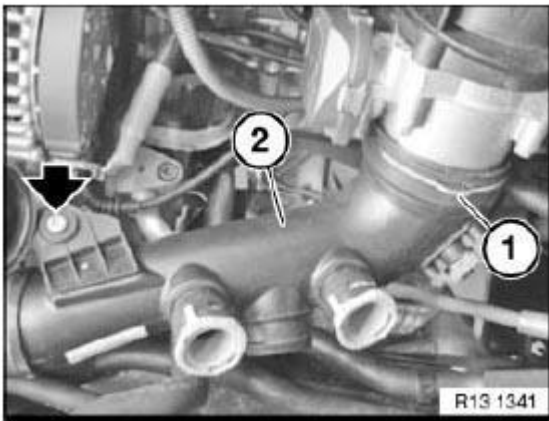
Identifying Quick-Connect Coupling And Charge-Air Duct
